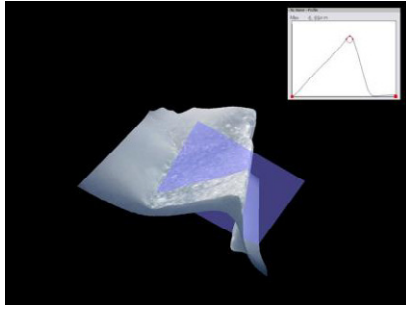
Tool edge radius 3D-reconstruction($6.7 \mu\text{m}$)
